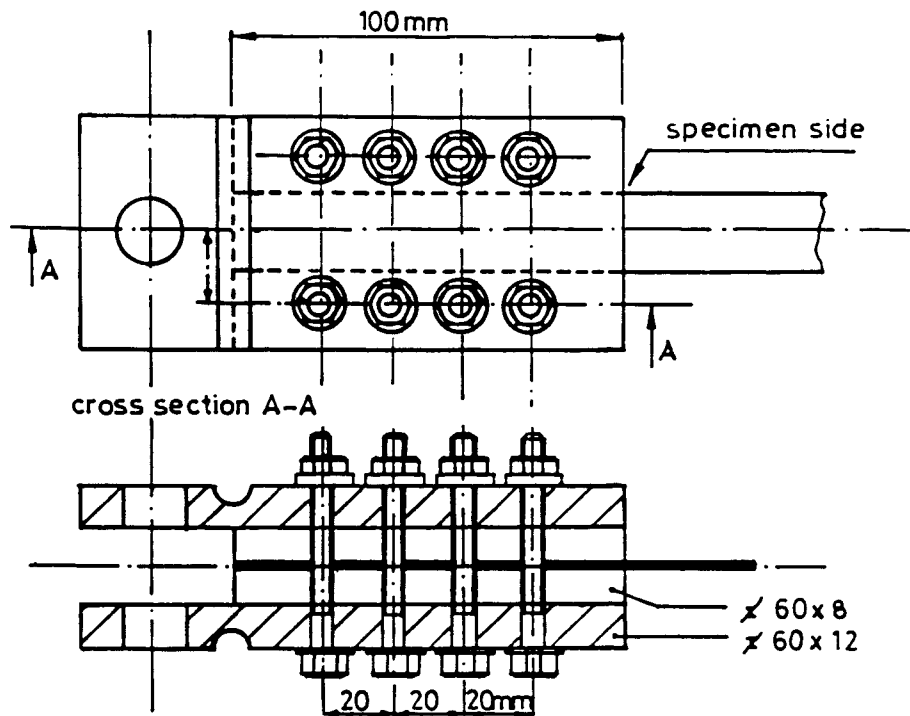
Clamp Anchorage with 8 Bolts for the Testing of ARAPREE Strips [11]
